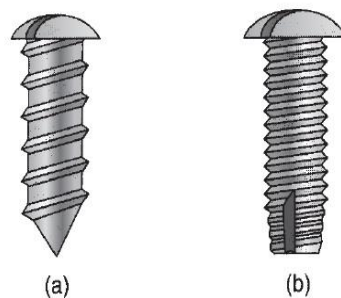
Self-tapping screws: (a) thread-forming and (b) thread-cutting.
